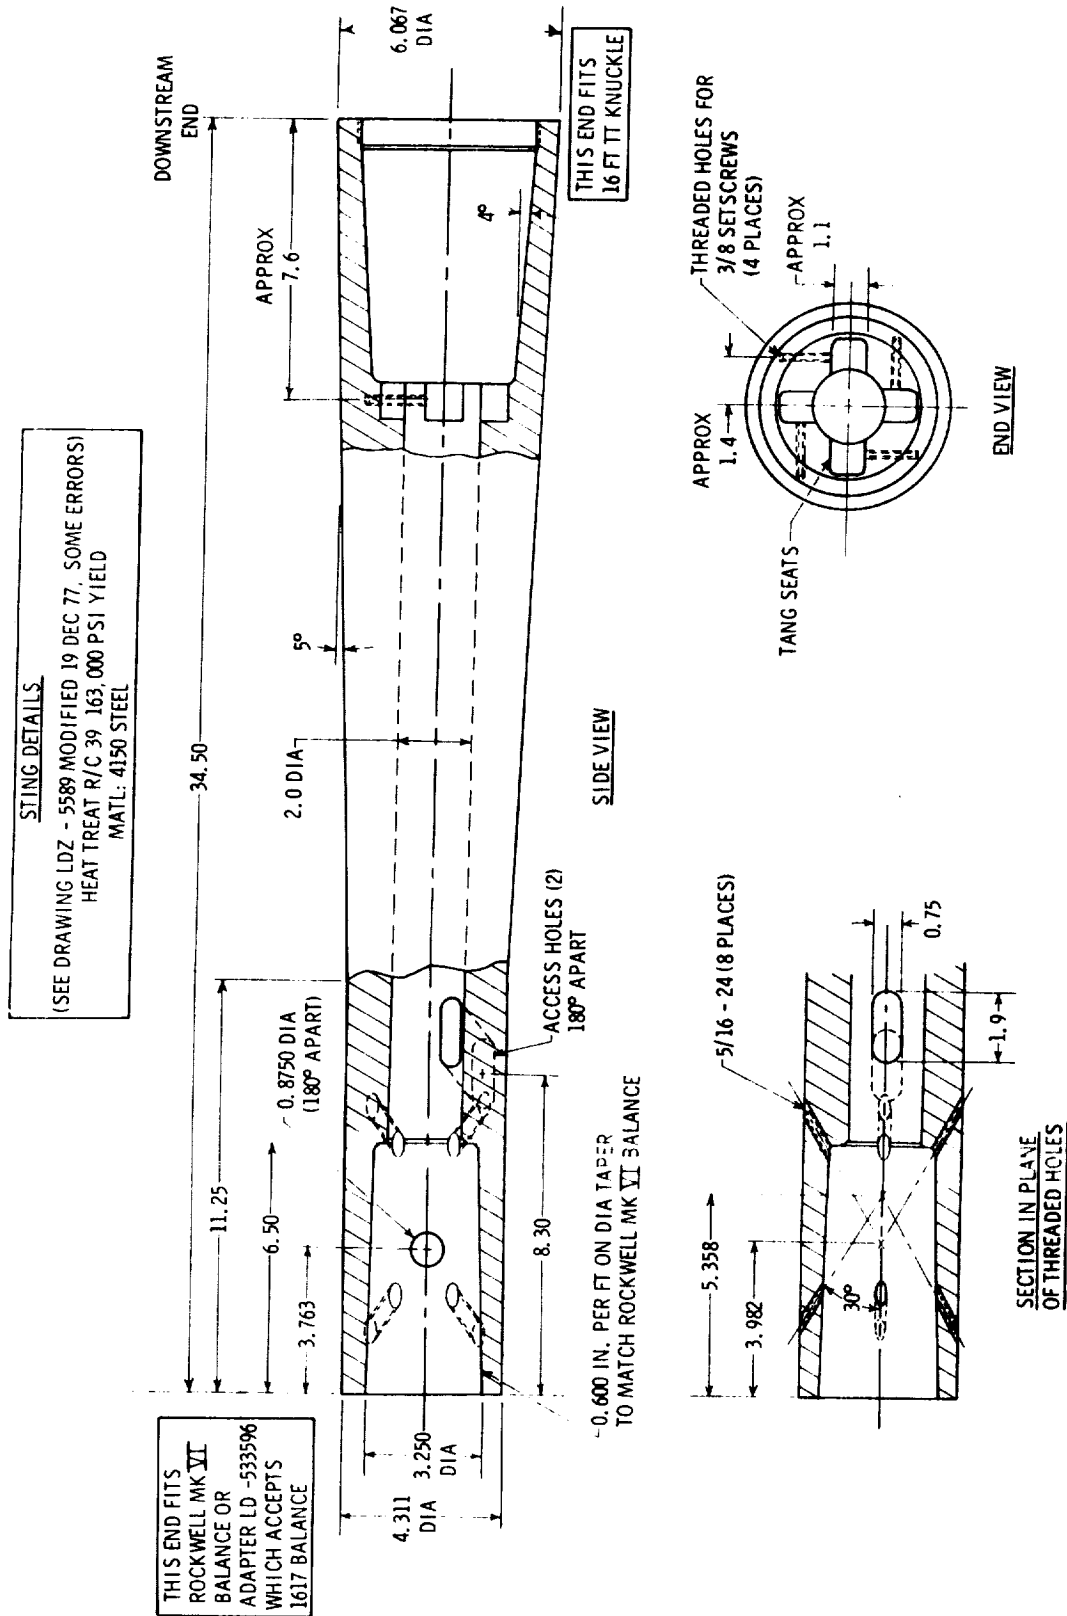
Sketch of sting LDZ-5589 MODIFIED 19 DEC 77. (All dimensions are in inches unless otherwise indicated.)
